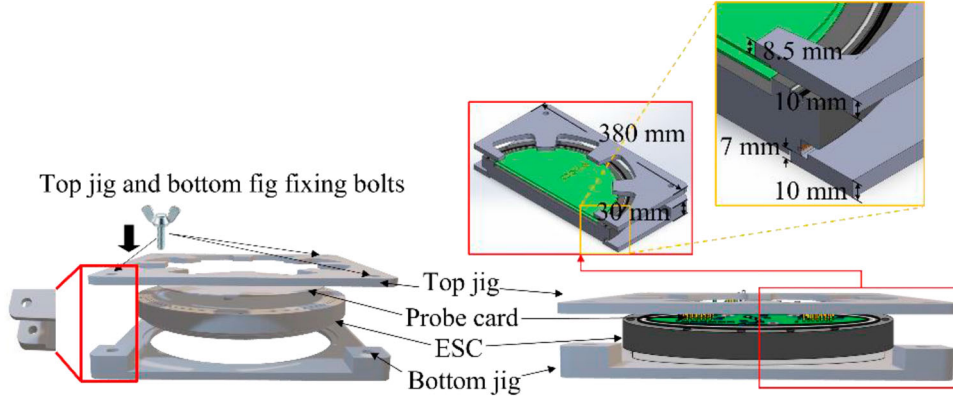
Jig design, 3D side view (left), and mounting schematic (right).
